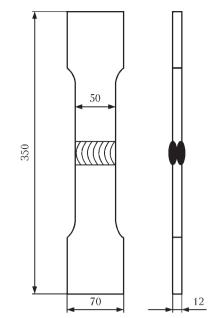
Shape and geometric sizes of butt welded joint specimen ing tension with an asymmetry of the cycle $R_{\sigma} = 0$ and frequency of 5 Hz. The criterion for test completion was the complete fracture of specimens or the excess of testing base of $2 \cdot 10^6$ cycles of stresses changing.
